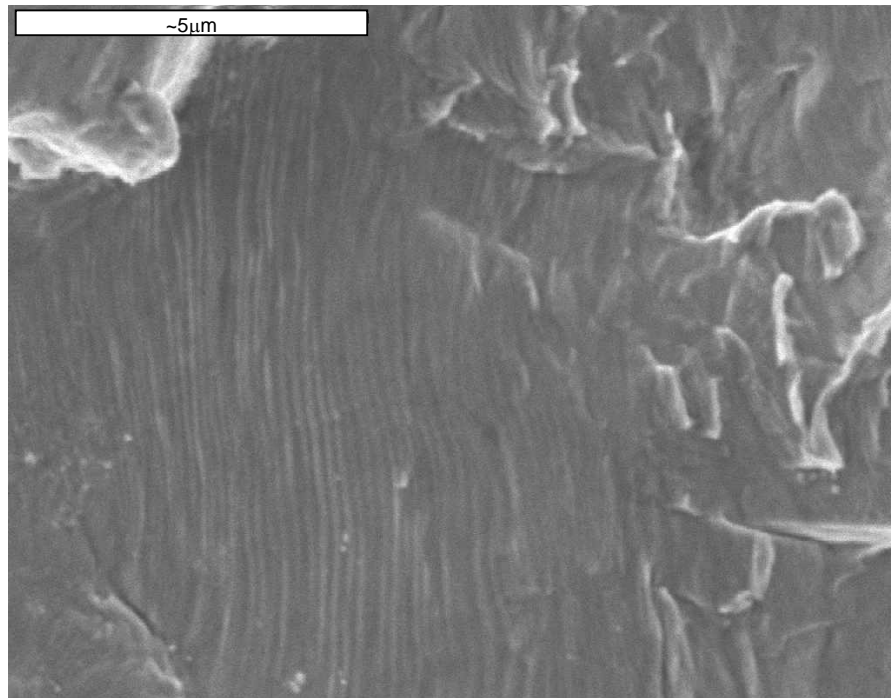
Fatigue striations observed on fracture surface between the deposit.
